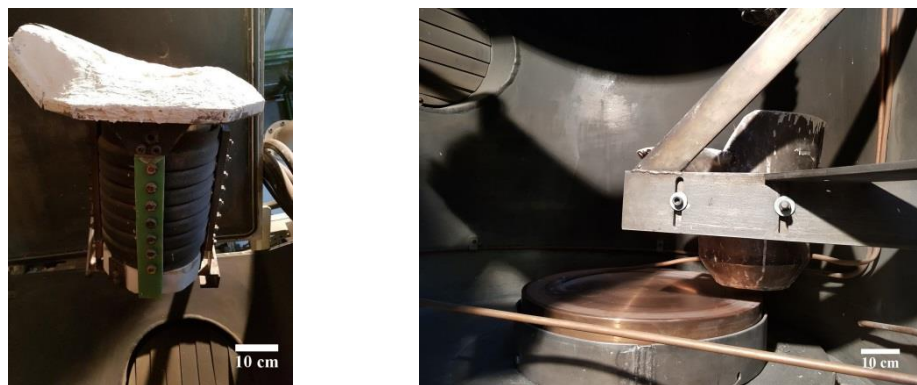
The melting crucible (left) and the receiving tundish with the rotating wheel (right) used for the strip casting of Sm-Co material.
